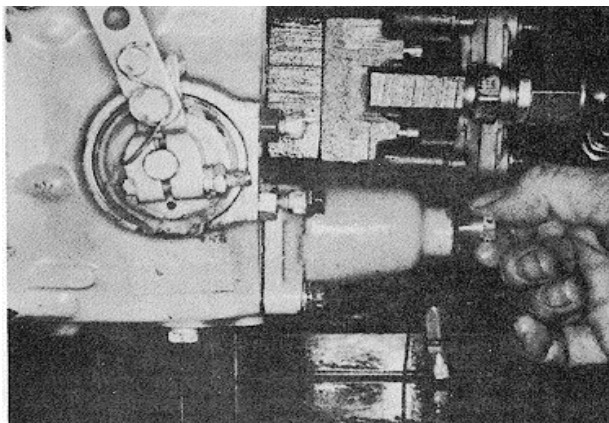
B, F5272. Spring pack cover plug removed, pump at 600 RPM.
